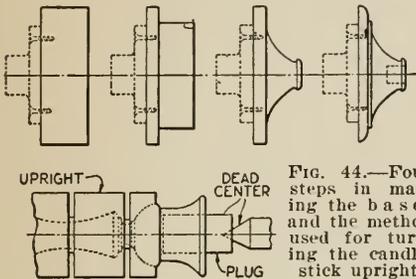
Four steps in making the base, and the method used for turning the candlestick upright.
